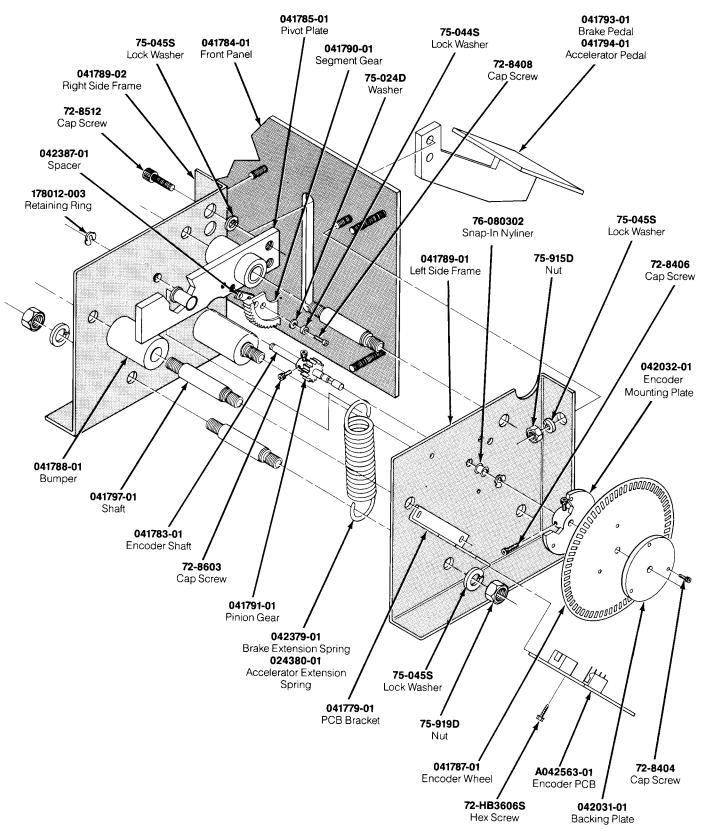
Foot-Pedal Control Assembly A041796-01 B
